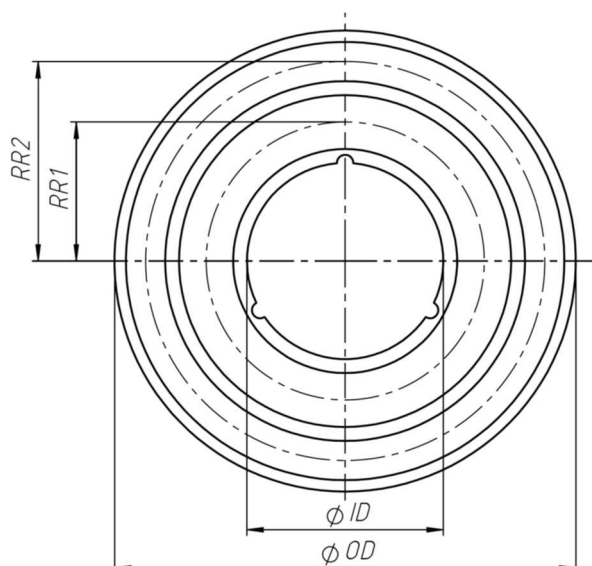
Dimensions for codewheels for the AP9600C encoder. RR = Readout Radius. Encoder 1 center must be aligned to RR1 and Encoder 2 center to RR2.
